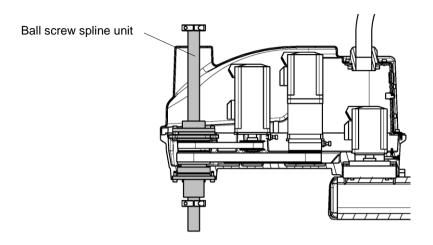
Ball screw spline unit location (KHL-500, KHL-600, KHL-700)
